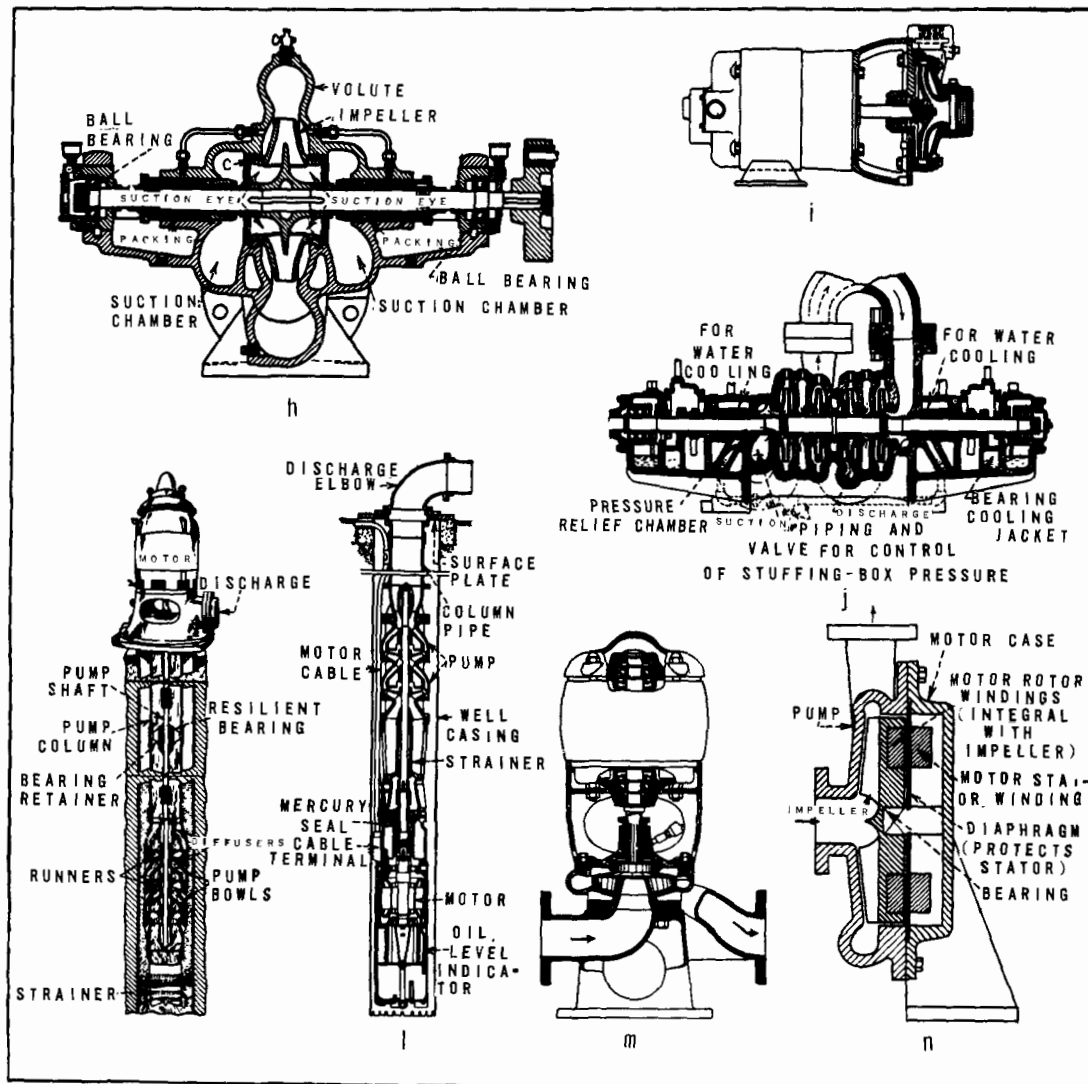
Centrifugal pumps: (h) single-stage, double-suction, split-case, centrifugal pump; (i) close-coupled water pump; (j) four-stage pump with opposed impellers; (k) turbine-type, deep-well pump; (l) submersible-motor, deep-well pump; (m) close-coupled, vertical, turret-type pump; (n) pump with integral motor (Dolman, 1952).
